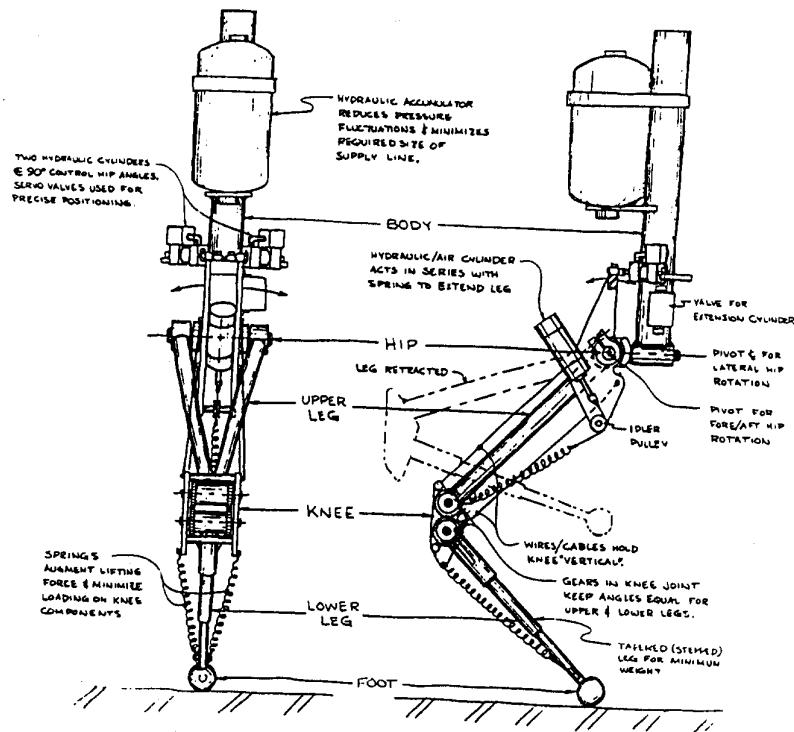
Ben Brown and I had this early concept for a one-legged hopping machine that was to operate in three dimensions. This version never left the drawing board.
